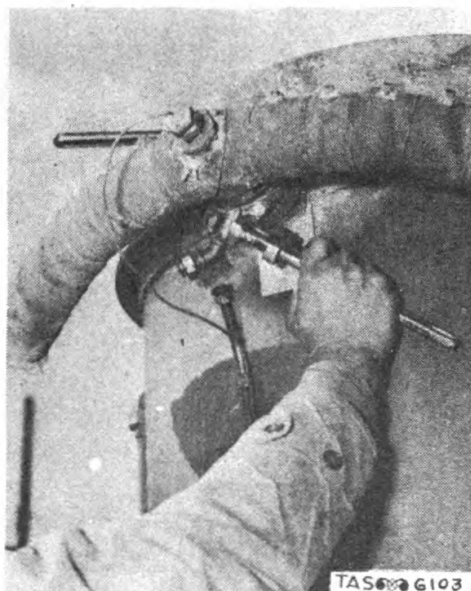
Detaching Spray Nozzle Gage Piping from Spray Nozzle Manifold by Removing Union and Nipple.
